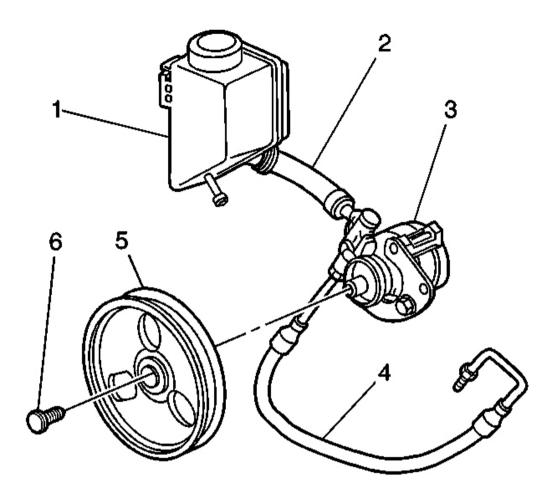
Power Steering Pump, Power Steering Reservoir, Clamp Retaining The Outlet Hose Courtesy of GENERAL MOTORS CORP.
